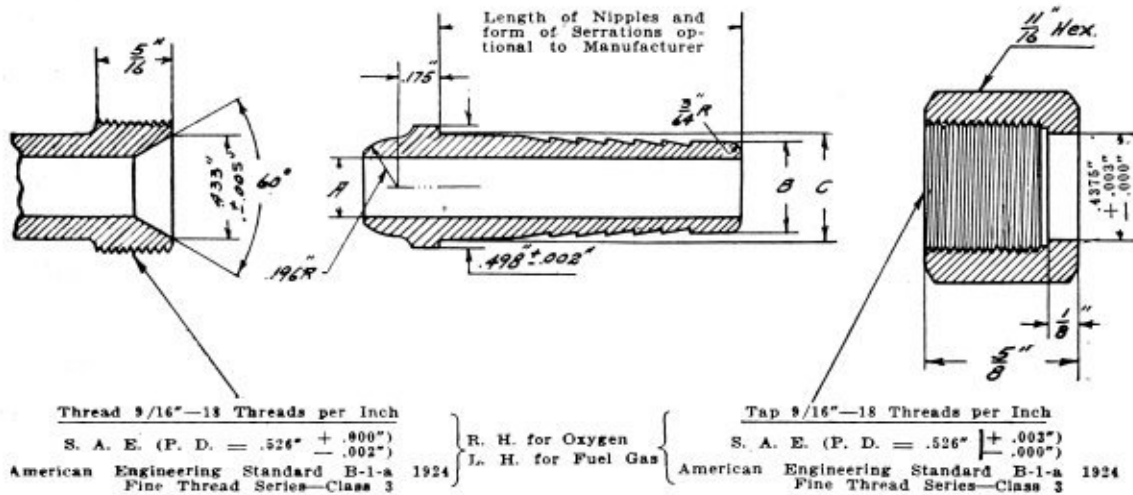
Standard design of "B" size hose connection for large size torches and for regulators
